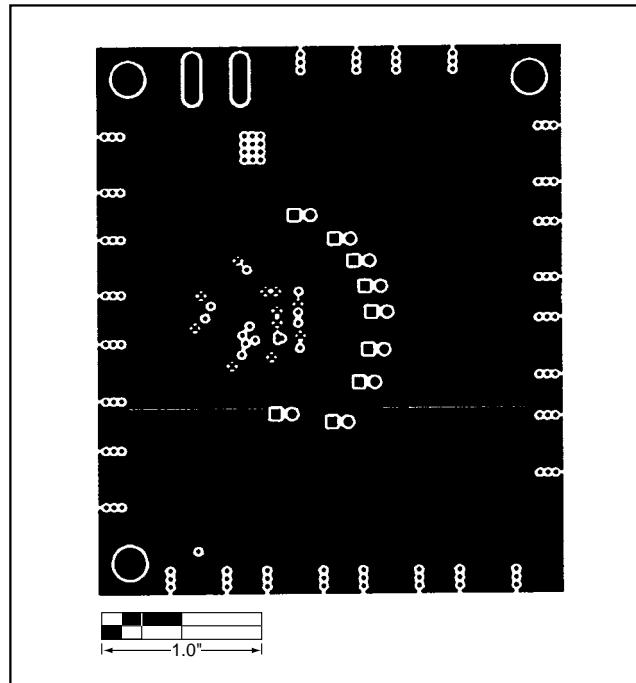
MAX3680 EV Kit PC Board Layout—Power Plane
